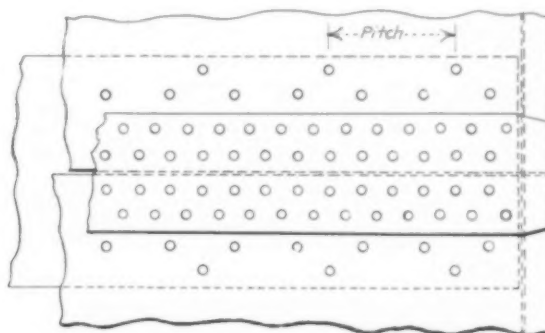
A DESIGN OF QUADRUPE-RIVETED BUTT AND DOUBLE STRAP JOINT
